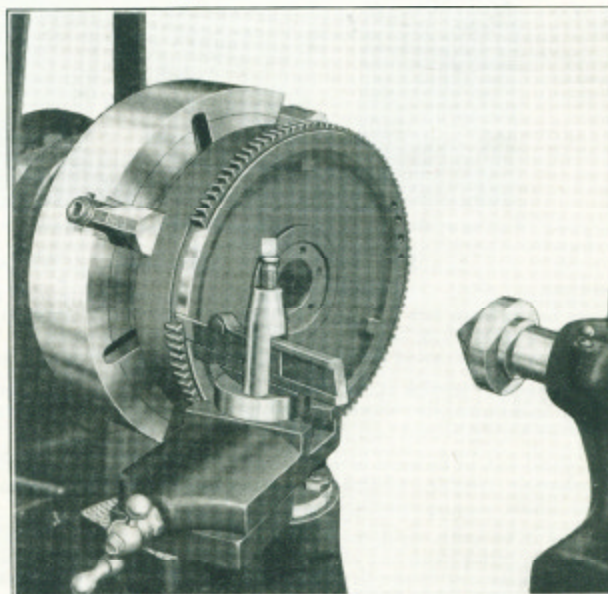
Close-up showing section of flywheel teeth cut away to show the slot cut under the teeth by the parting tool.
